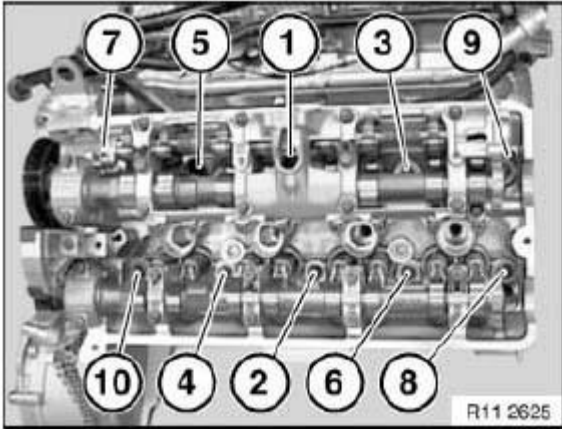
Tightening Sequence Of Cylinder-Head Bolts
